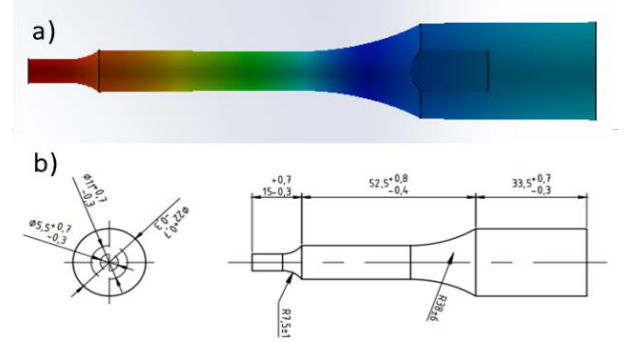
Ultrasonic welding horn working at 28 kHz: (a) finite element analysis result, (b) drawing of outline profile
